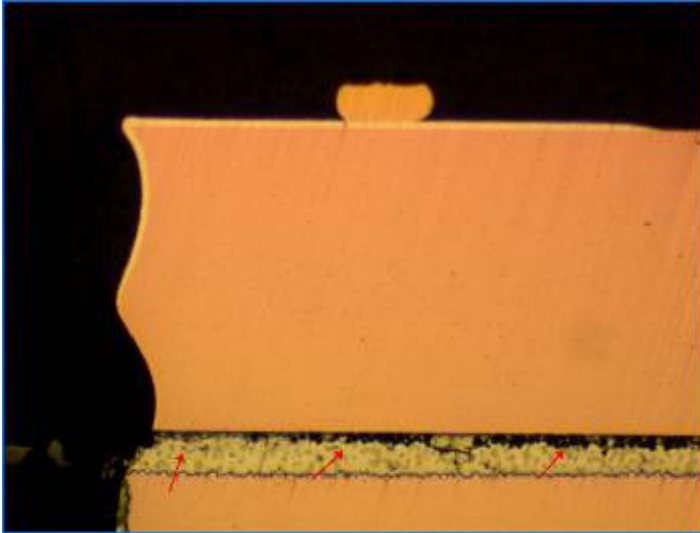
cross section, SN68, U28, right lead solder crack, 200xa
